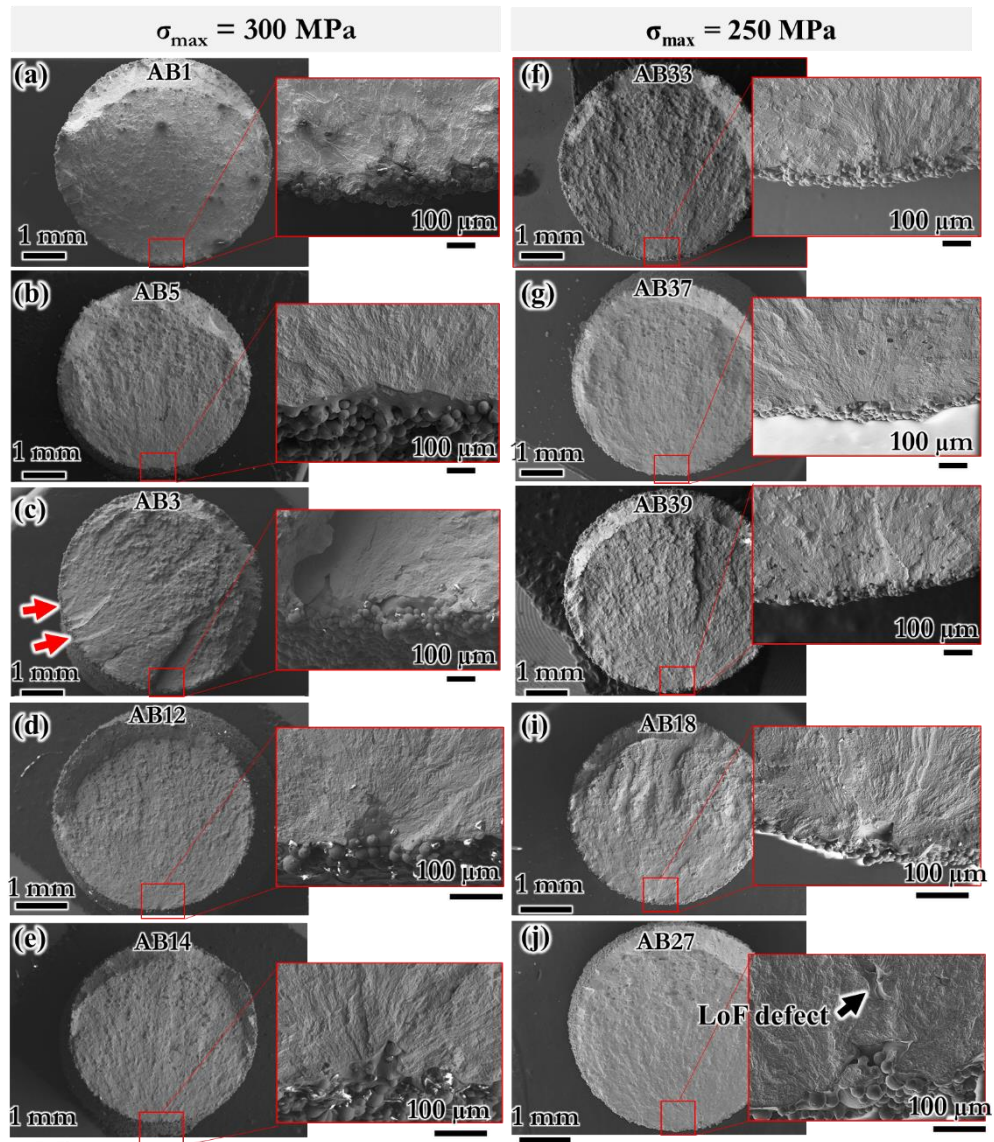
Fatigue fracture surfaces of some specimens fractured at (a)-(e) 300 MPa and (f)-(j) 250 MPa.
